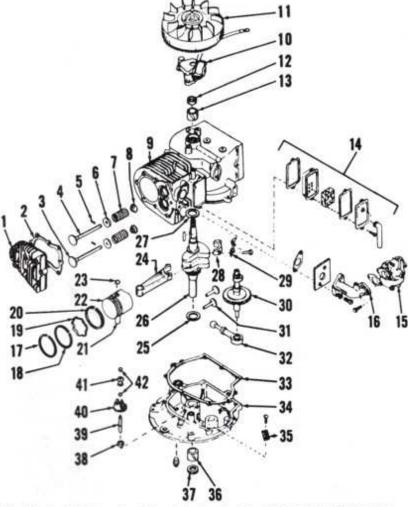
Exploded view of vertical crankshaft engine typical of Models VH70, VM70, VM80 and VM100. Renewable bushings (13 and 38) are not used on Models VM70, VM80 and VM100.
